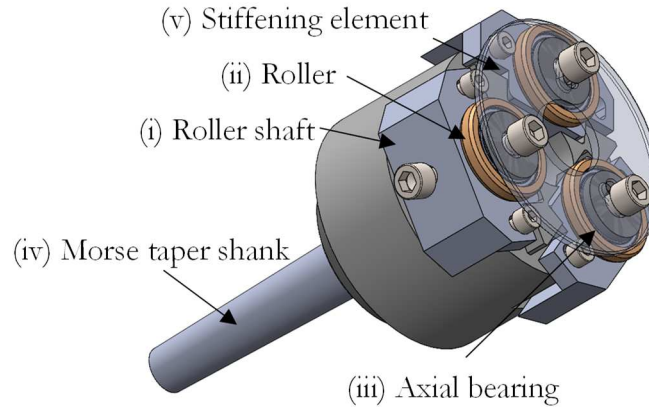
Translational part: (i) Roller shafts; (ii) Rollers; (iii) Axial bearings; (iv) Customized Morse taper shank; (v) Stiffening element.
